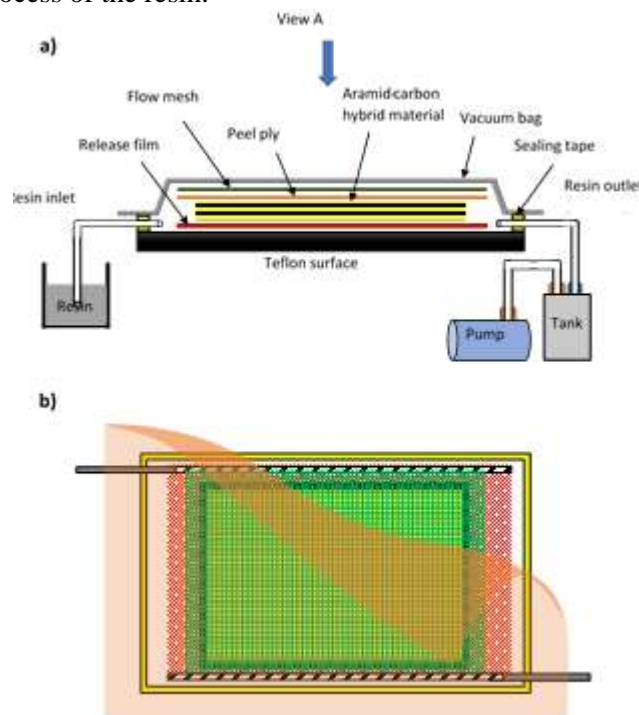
VARTM method demonstration (a) side view; (b) top view (view A)
